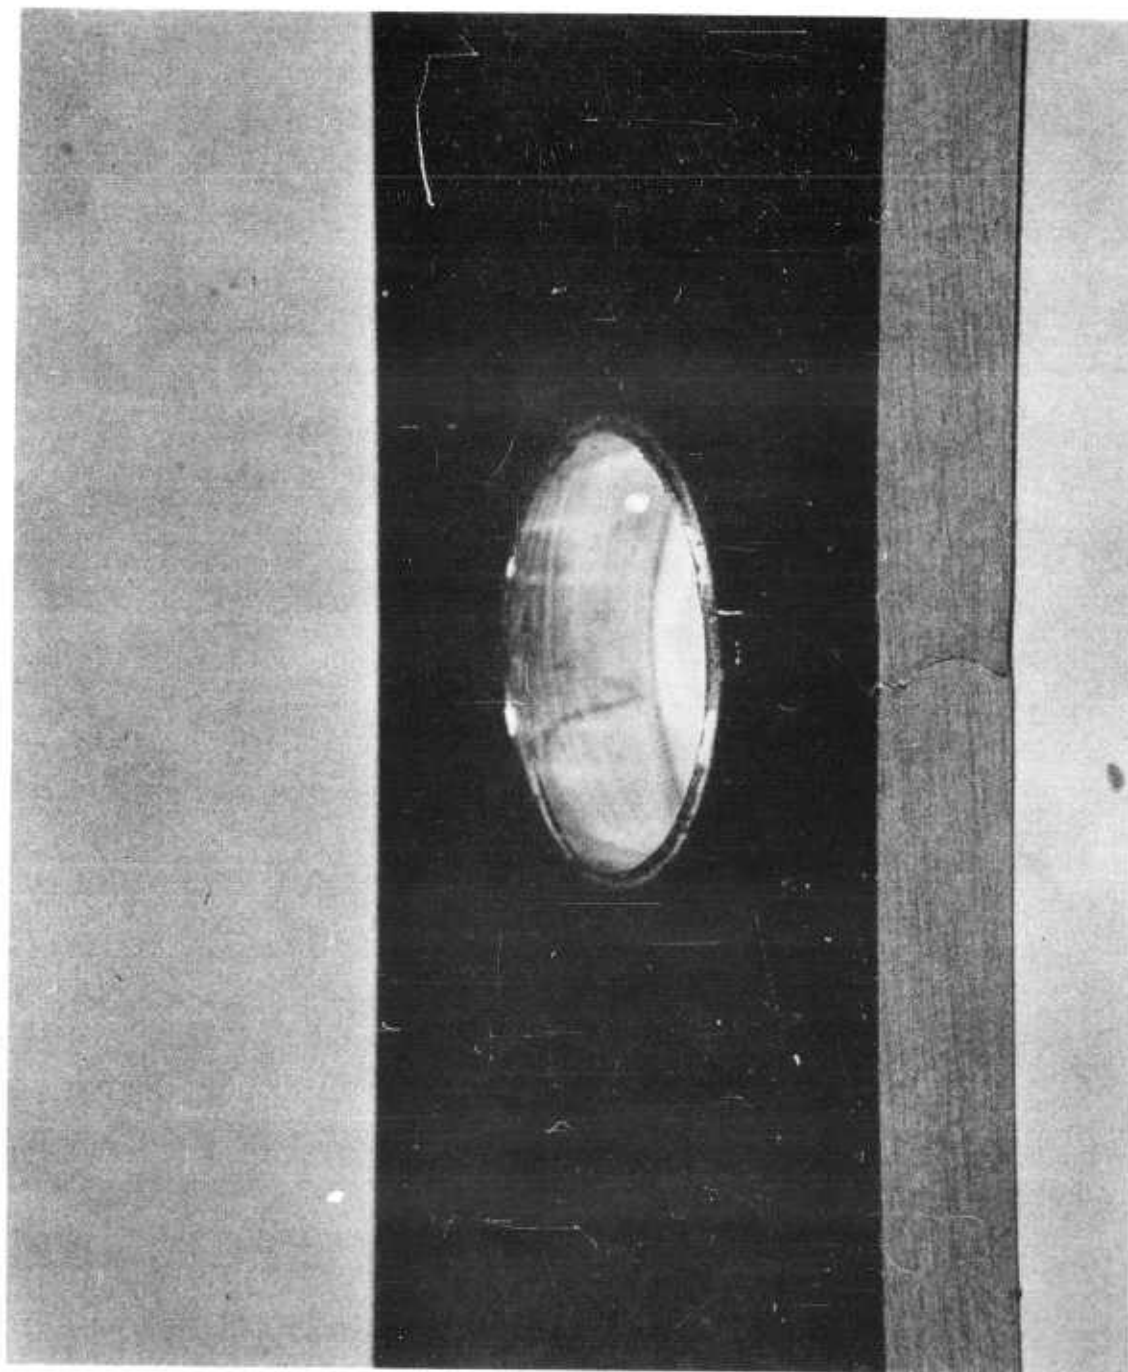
Typical Hole with Burr Titanium Fatigue Specimen
